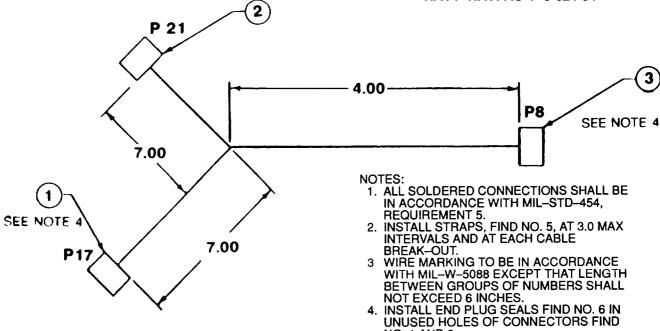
Special Relay Assembly to Fault Locating Indicator Wiring Harness, Drawing No. 76-2247
